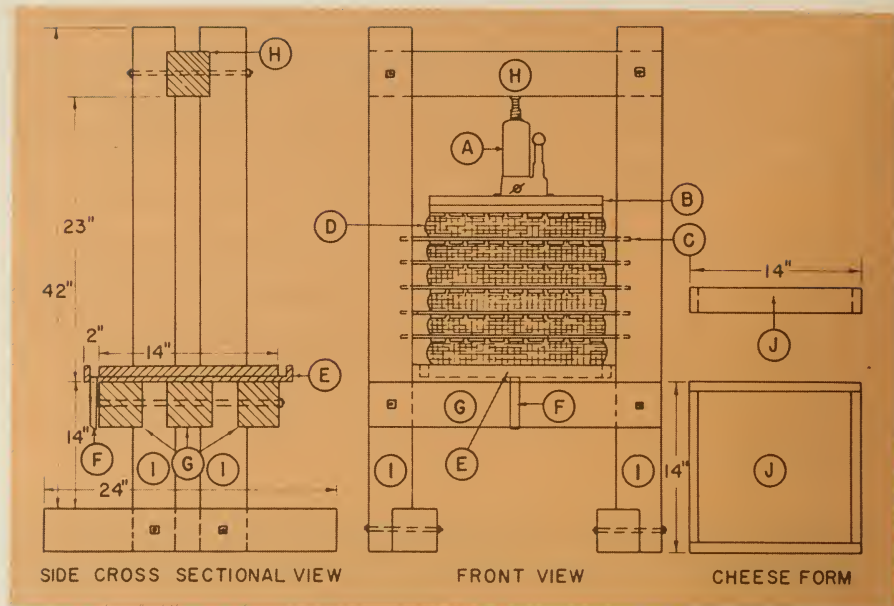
Juice press. A, Hydraulic jack, 1 1/2 tons capacity, 8-in. lift. B, Jack support, a 14 x 14-in. piece of 3/4-in. fir plywood or hardwood with 6 slats 1/4 x 1 in. nailed on one side. C, Racks. Five racks 14 x 14 in. are made from 1/4 x 1-in. slats of hardwood nailed to 1/4 x 1 1/2-in. slats at the edges. The center slat is 18 in. long and serves as a guide between the uprights, I. It is 2 in. wide and has a center slot. The nails are stainless steel. D, Press cloths of medium factory cotton are about 36 in. square. E, Press base is a 17 x 17-in. piece of 3/4-in. plywood fastened to supports. G, A 14 x 14-in. piece of 1/2-in. plywood is centered on the larger piece to channel the juice to the outlet, F. Four slats 1/4 x 1 1/2 in. on edge form the sides around the base. F, Juice outlet made of 3/4-in., acid-resistant or plastic pipe. G, Supports for press base. H, Press top is of hardwood or fir plywood with a metal plate at the point of contact of the jack. I, Uprights are reinforced with 1/4 x 4-in. metal strapping across the press top and 20 in. down two sides. All uprights and crosspieces are made of 4 x 4-in. fir. J, Cheese form is 2 x 14 x 14 in. and is made from 3/4-in. hardwood. All wooden parts of the press that come in direct contact with the juice are coated with hot paraffin.
